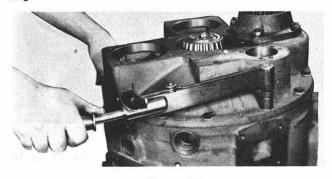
Install rear cover bolts and lockwashers. Tighten bolts 41 to 45 ft. lbs. torque [55,6 - 61,0 N.m].
